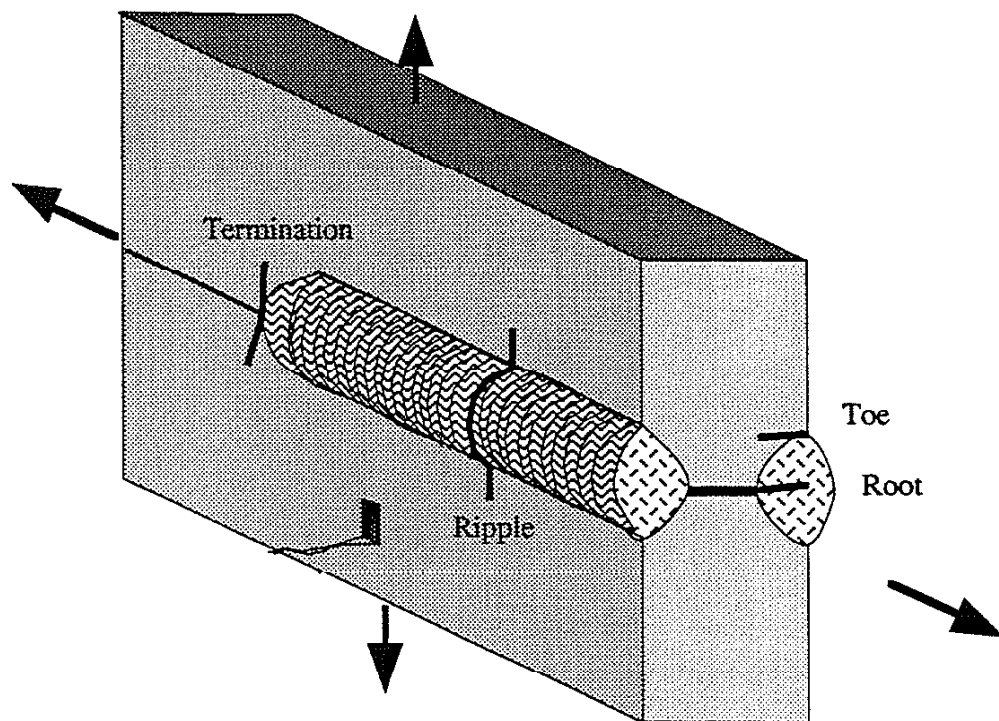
Fatigue crack initiation sites in weldments: ripple, toe, root, or weld termination.
